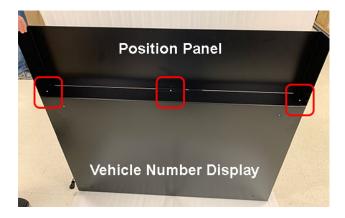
Screw locations to attach Position Panel to Vehicle Position Display
